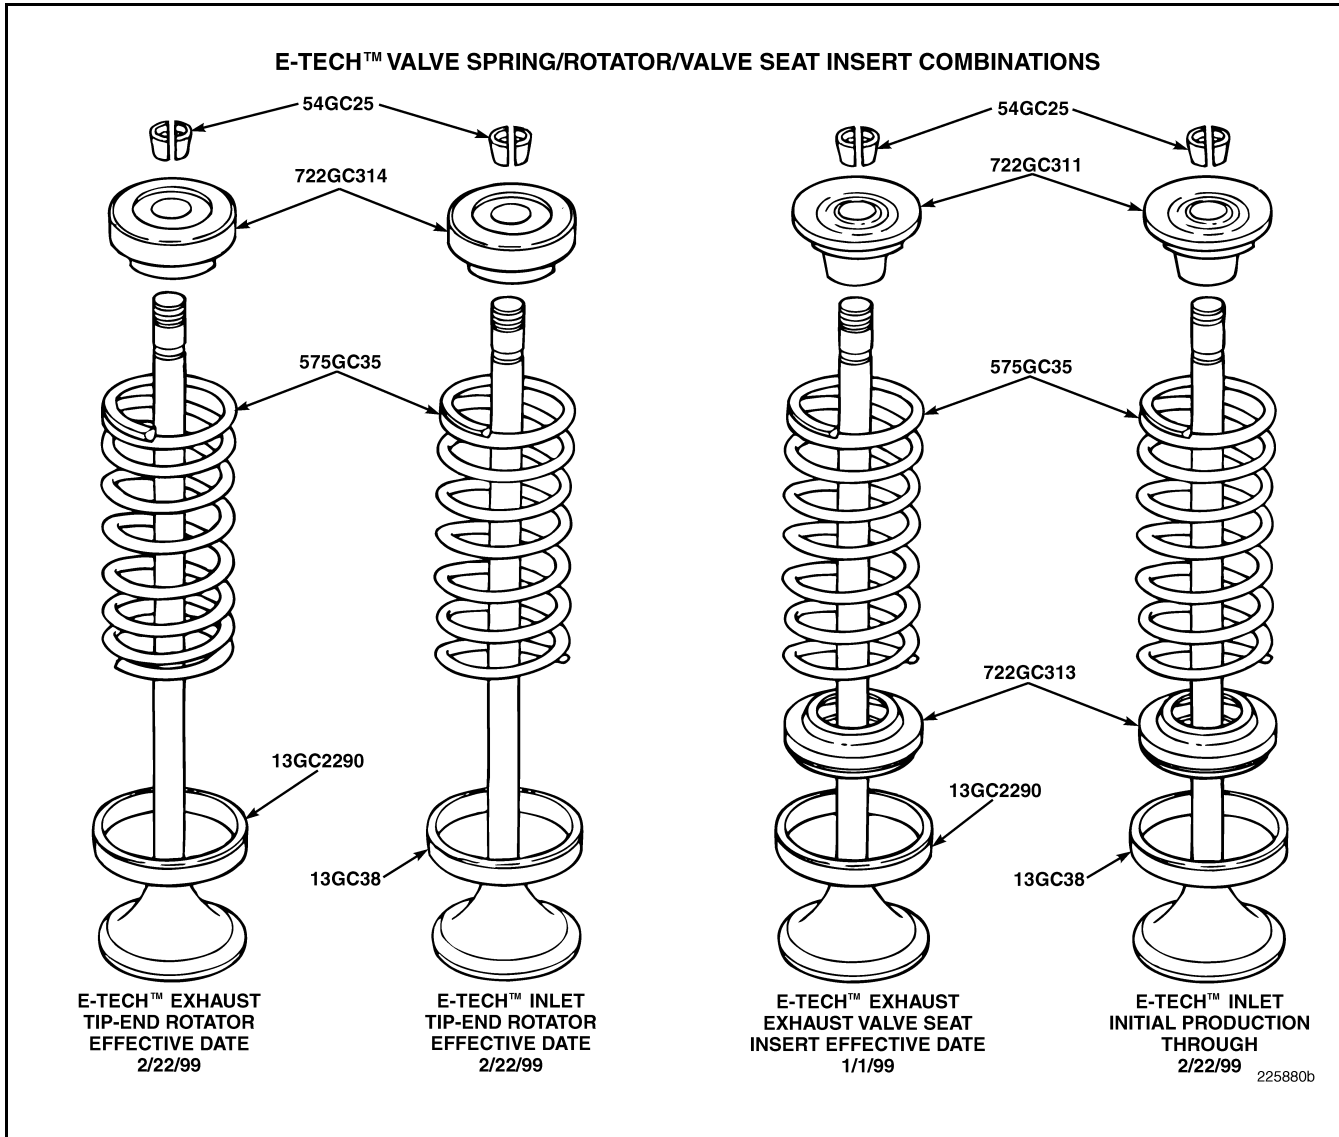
Valve Spring, Rotator and Valve Seat Insert Combinations
